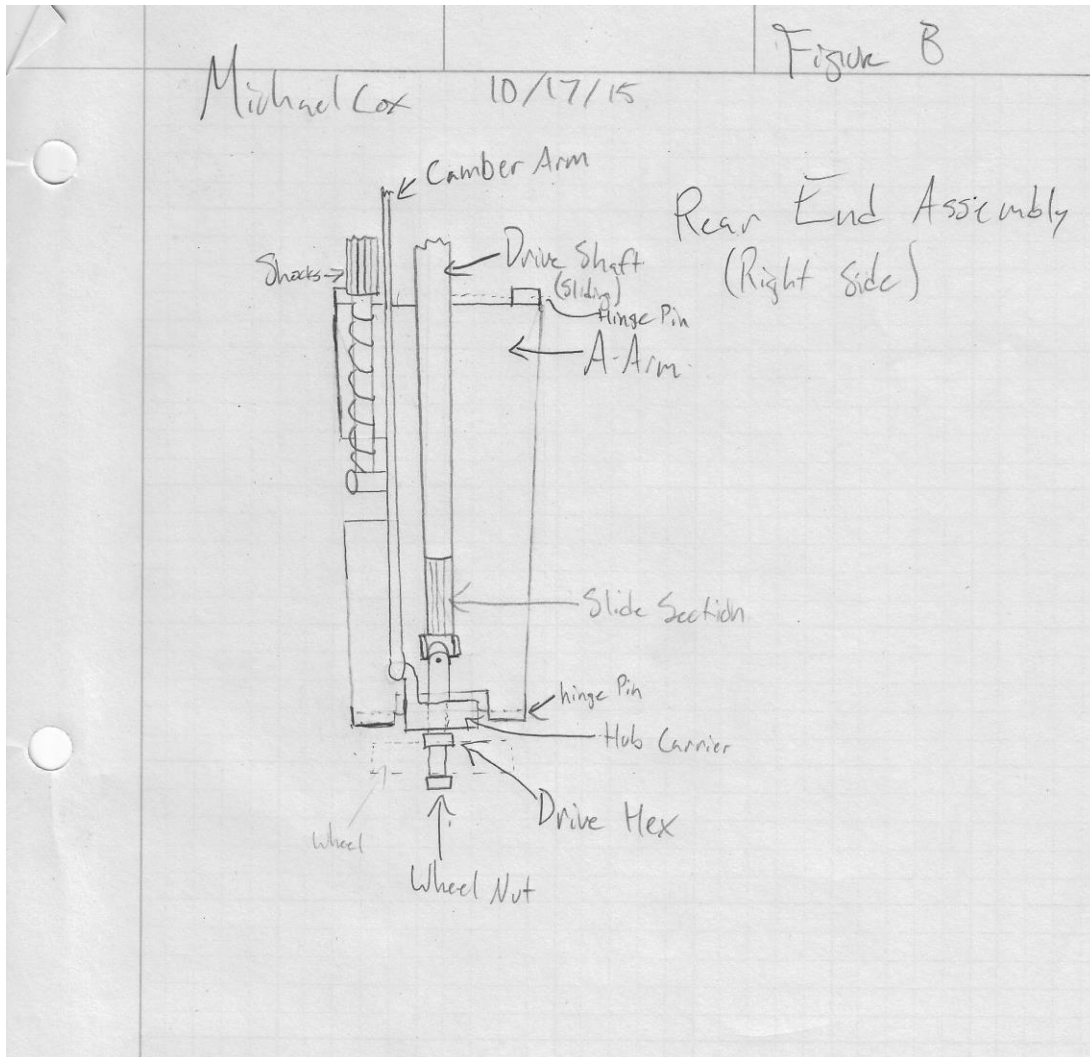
Initial Design of Rear Assembly (unused design iteration)
